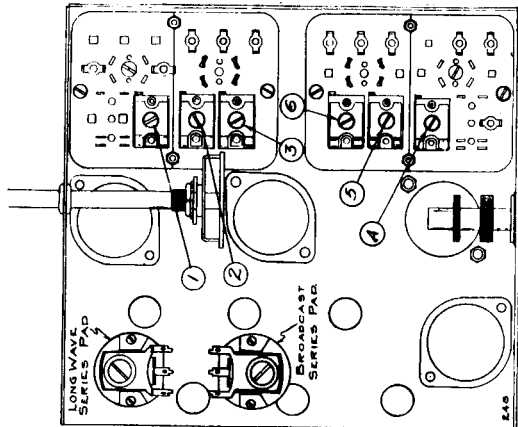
BOTTOM VIEW (Showing Trimmers)
